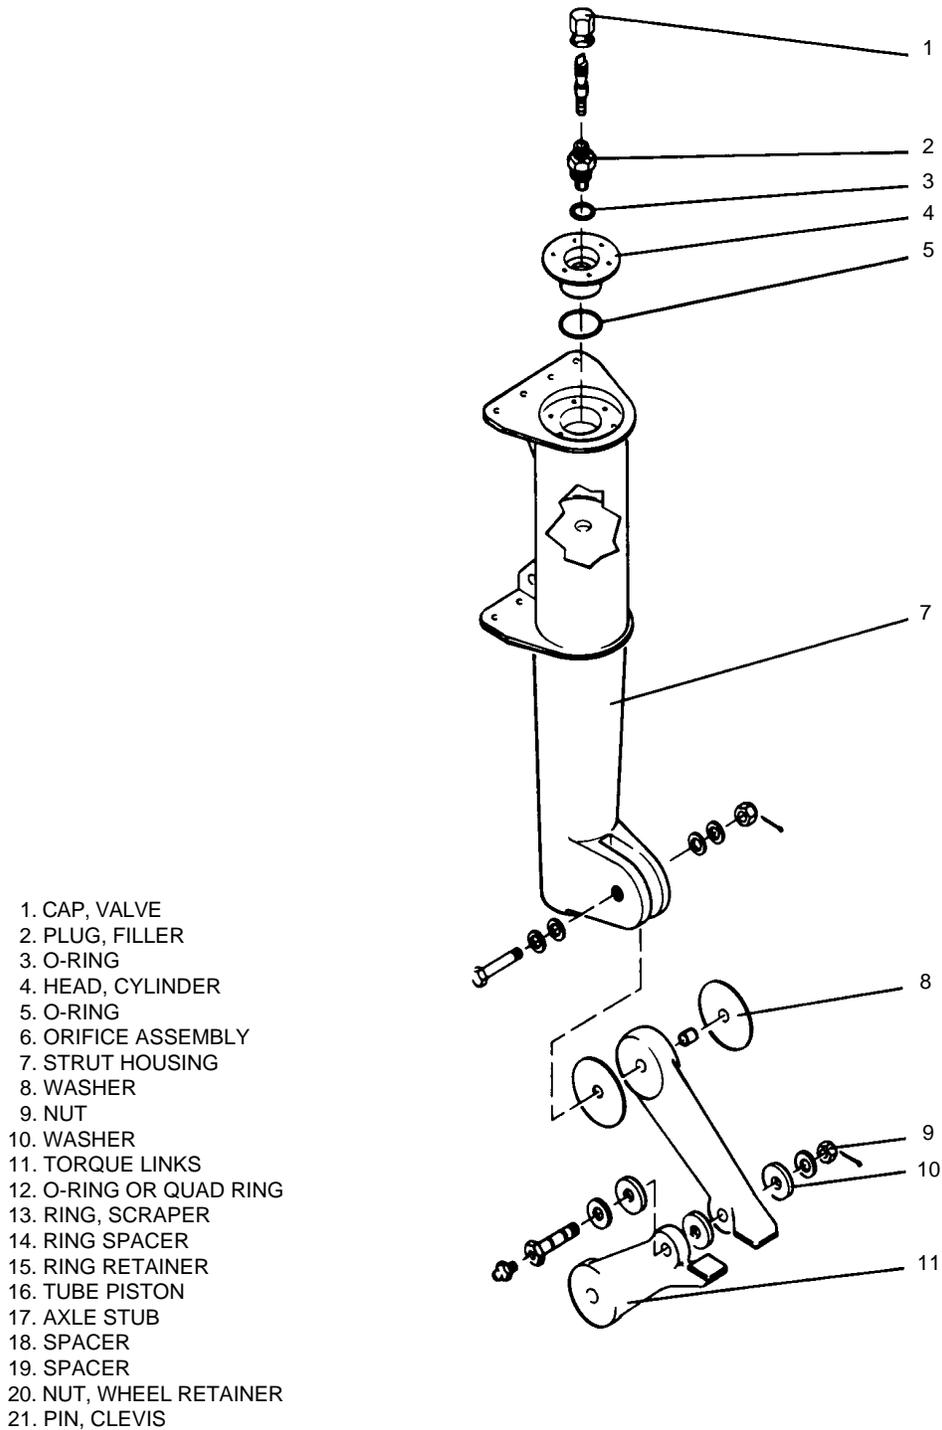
main Gear Oleo Strut Assembly (cont)
